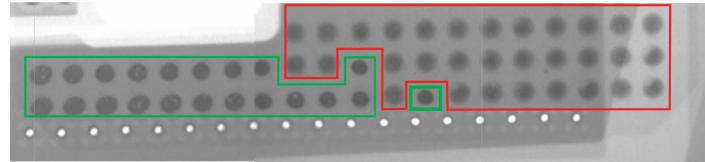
X-ray of a BGA solder joint connection between a standard PCB and an IMS board; Green: BGA with high contrast; Red: BGA with less contrast
